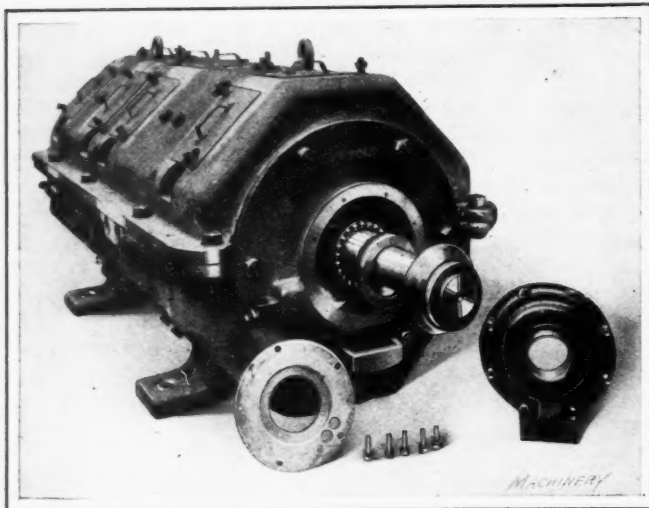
Motor-generator Set with Bearing Cap removed to show Ball Bearings
